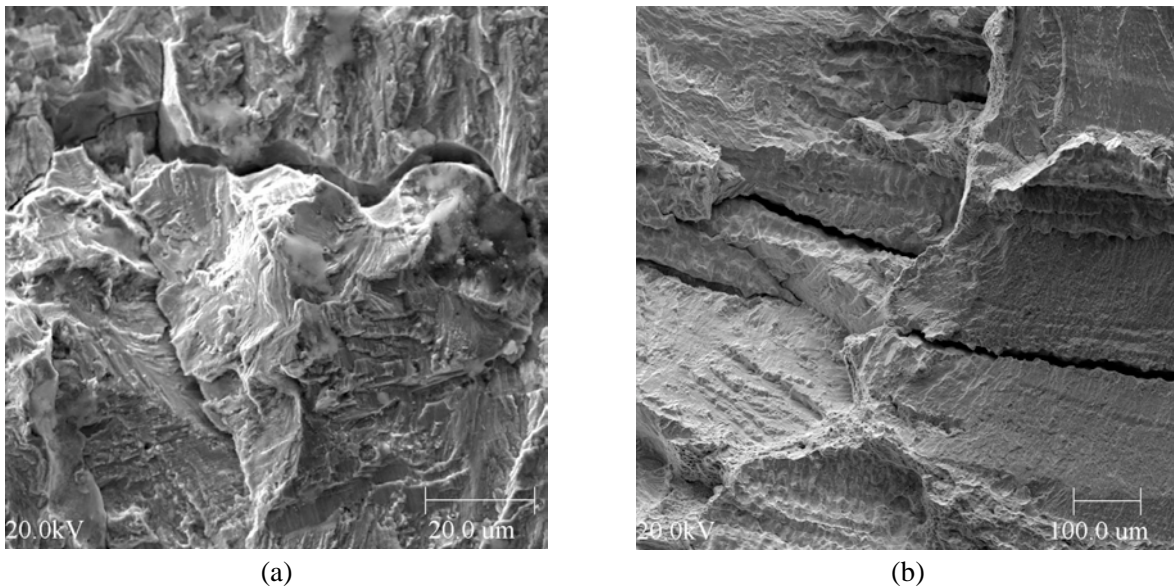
Micrographs from the fracture surface of weld specimens: (a) Davis-Besse Specimen J11CC-1 and (b) V.C. Summer Specimen BCR-01.
